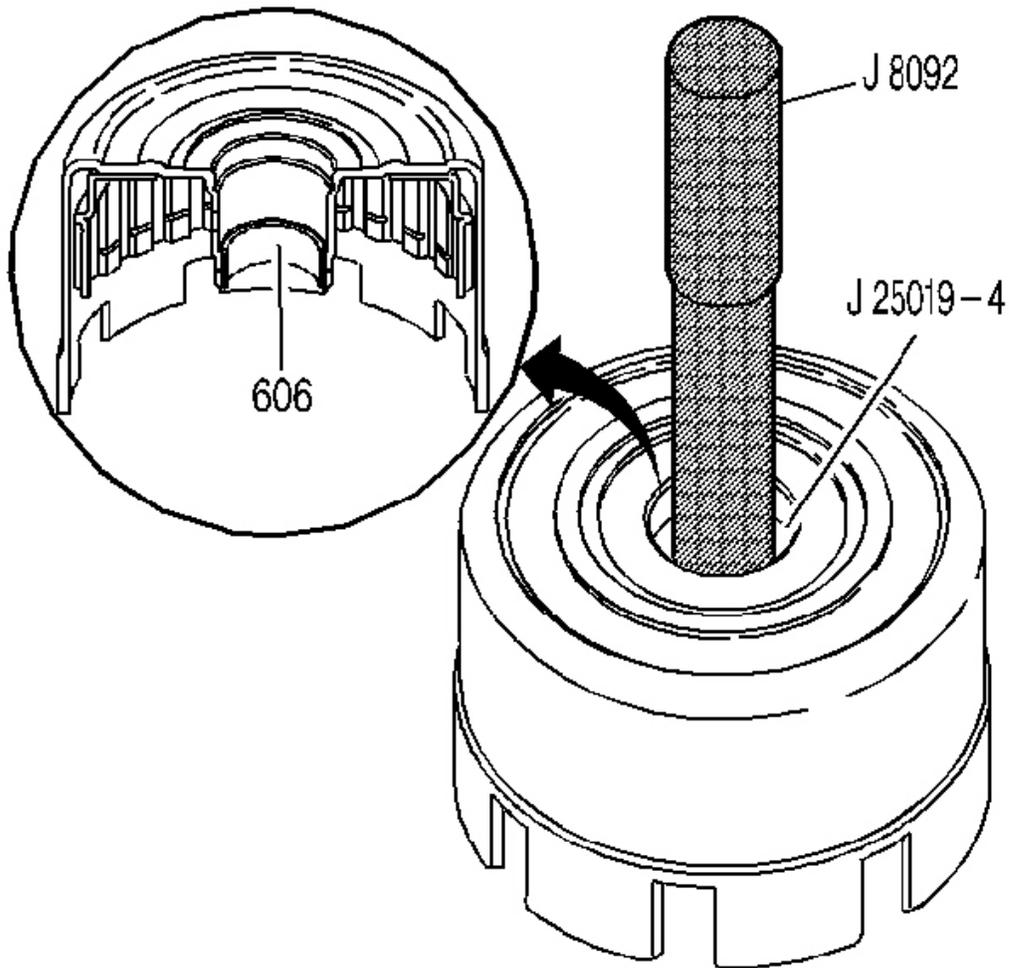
J 25019-4, J 8092 & Reverse Input Clutch Rear Bushing
